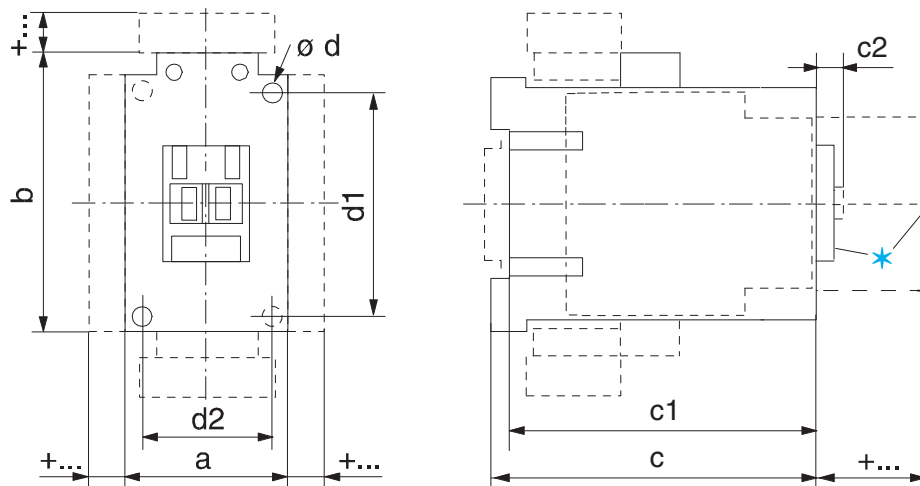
Mounting Position — 100-C Contactors; 100S-C AC Contactors and DC contactors with electronic coils
